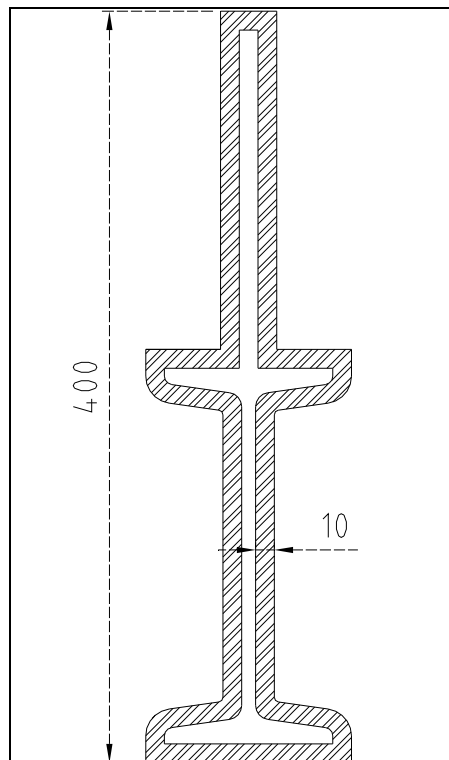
Cross-section of Welding Around I-200 Profile and Flange
